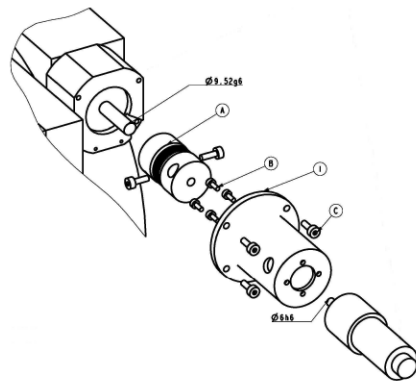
motor subsystem design and mechanical part attached to the bearing.
